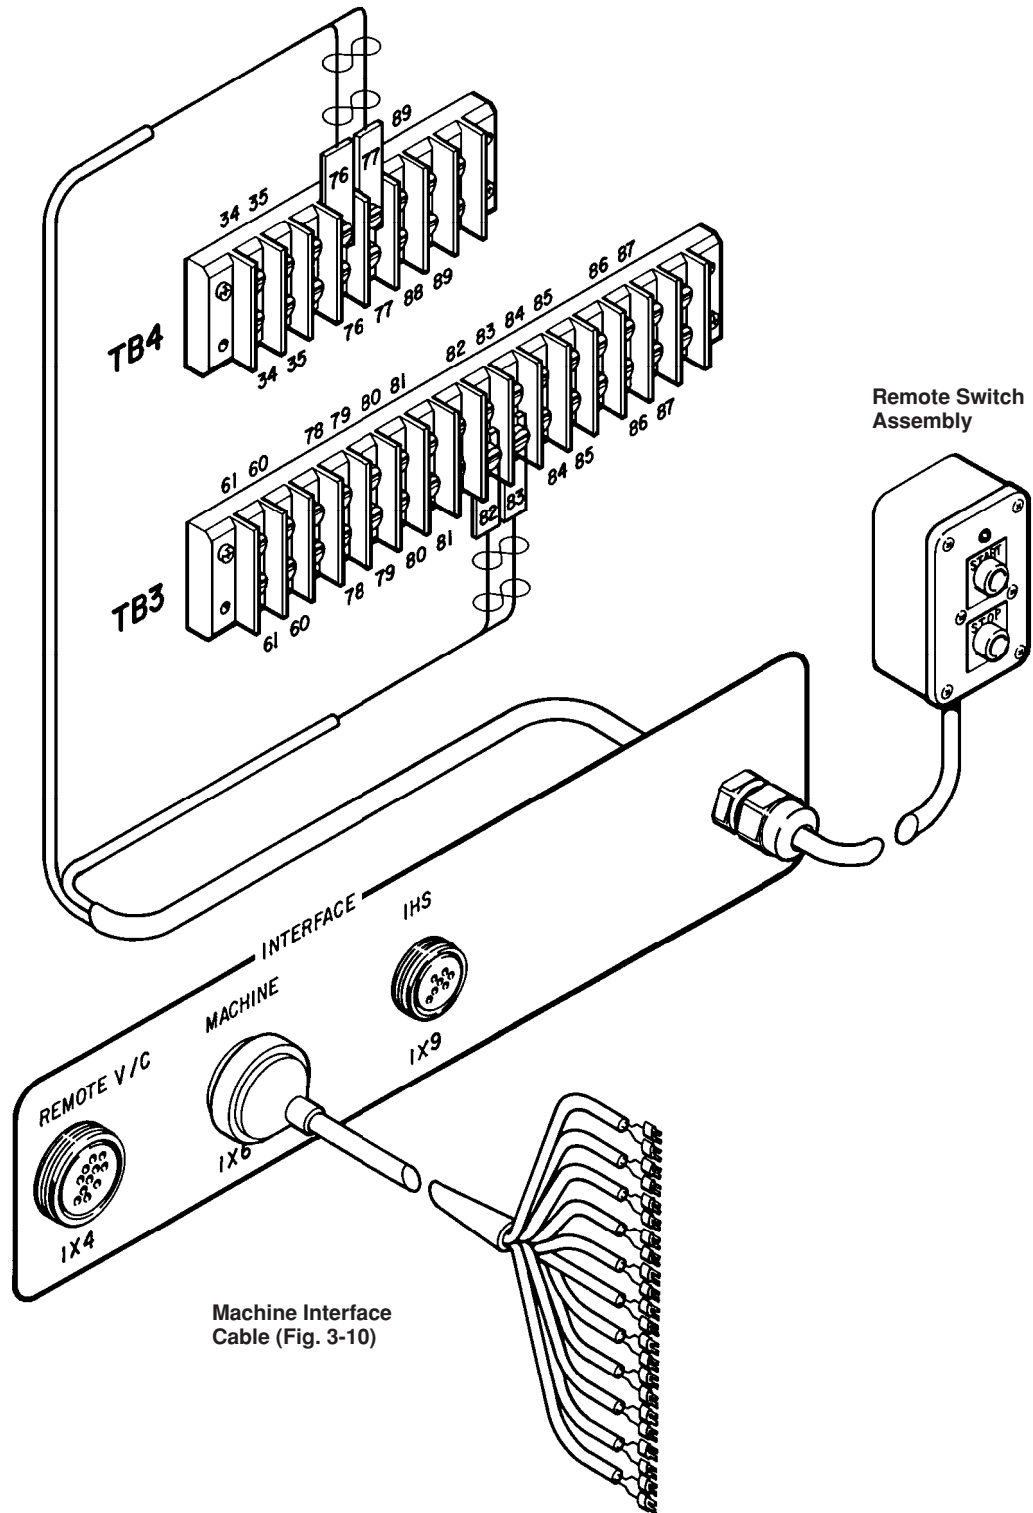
Machine Torch System Interconnection Diagram without THC Option
